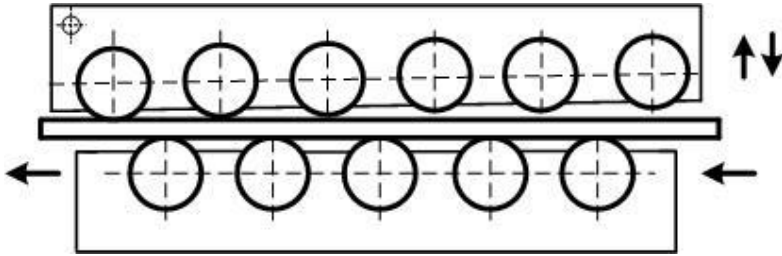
Sheet-straightening machine with an inclined arrangement of rollers
